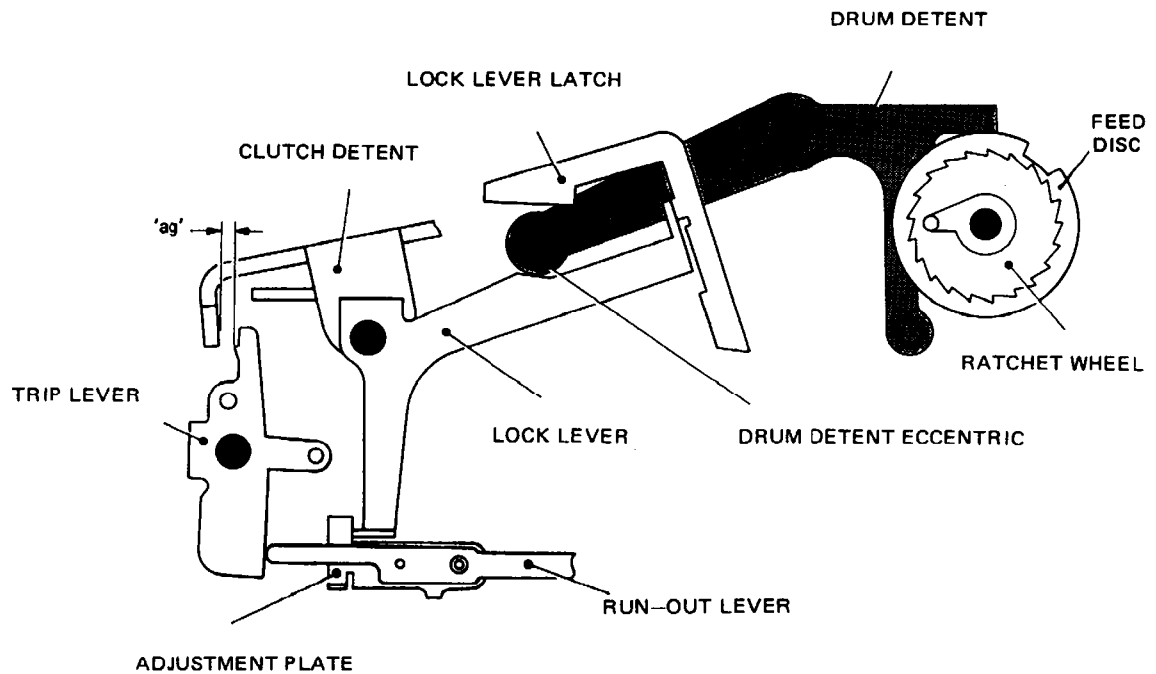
RUN-OUT PUSH ROD MECHANISM (REAR VIEW)
